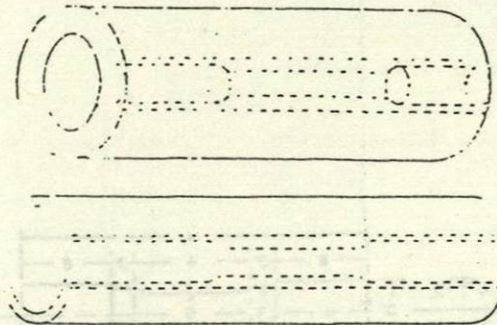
Squeezing Jig for Flattening Ends of Full-Size Tension Test Specimens
